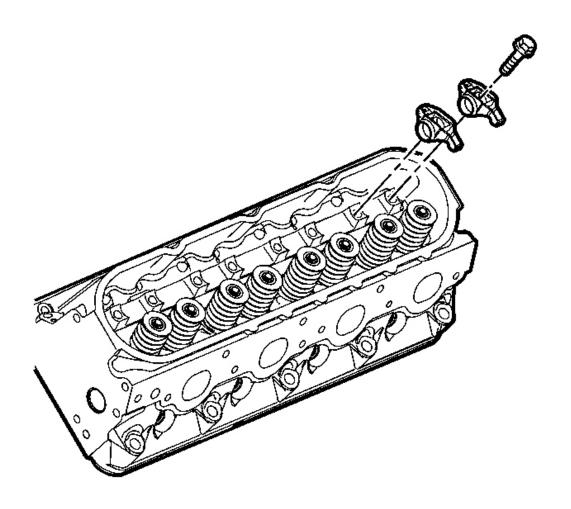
View Of Rocker Arms & Bolts Courtesy of GENERAL MOTORS CORP.
